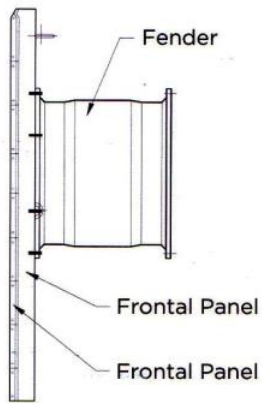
Mount Frontal Panel to Fender c/w Vulcanized with Mounting Plates
